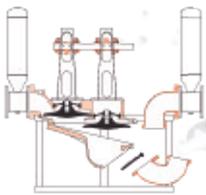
Removal of lower swan neck and suction housing. Suction housing hinged to intermediate housing allowing easy removal.
